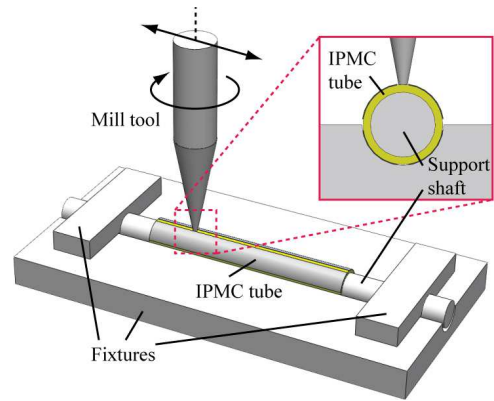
Electrode surfacing milling process for tube-shaped IPMC actuator. IPMC tube is held in place using fixtures, and a milling tool removes the electrode material.
